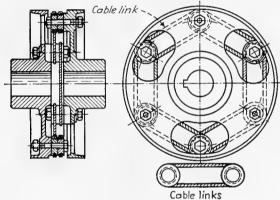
This Bruce-Macbeth Engine Company coupling is similar to that of Fig. 276, except that six endless wire cable links are used, made of plow-steel wire rope. The links engage small metal spools mounted on eccentric bushings. By turning these bushings, the links are adjusted to the proper tension. The load is transmitted from one flange to the other by direct pull on the cable links.
